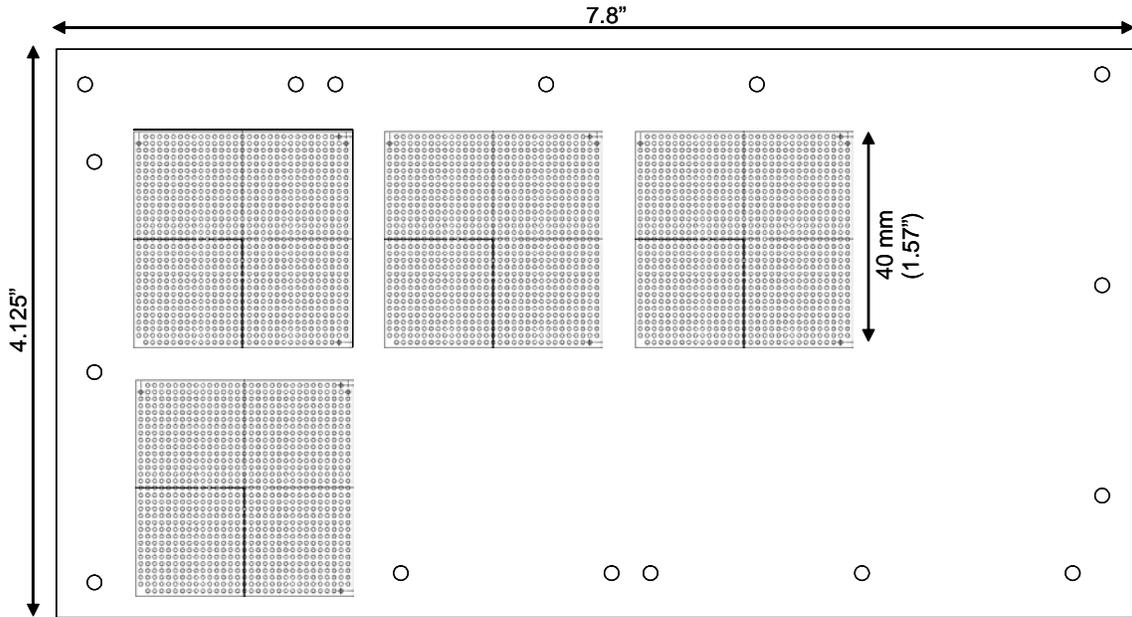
Drawing showing the footprints of four XC2V6000 chips on a DFEA daughterboard.
